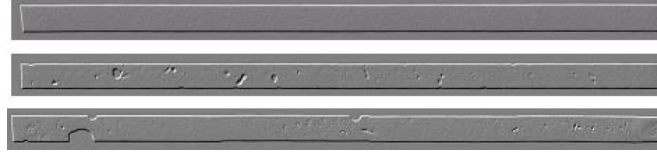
X-Ray Inspection of Solder Test Specimens (Good and Bad Samples)
